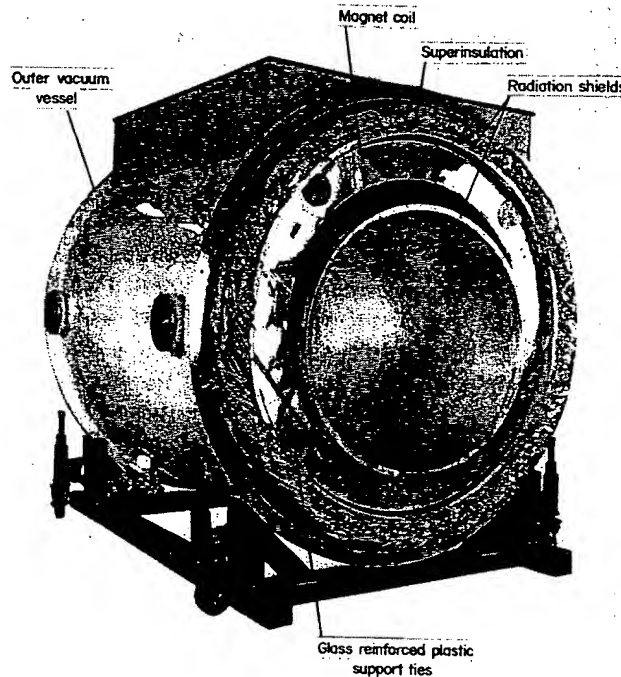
A superconducting magnet, designed for whole-body scanning, during assembly. A field in the range 0.5–1.5 T is produced in a bore of 1 m. (Courtesy of Oxford Magnet Technology Ltd.)
